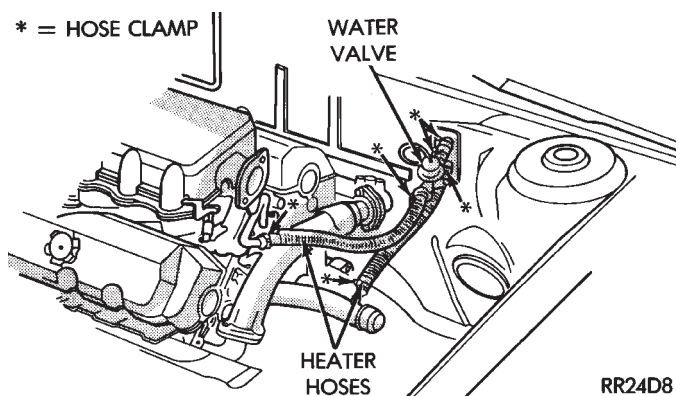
Heater Hose Routing—2.2 L, 2.5 L Engines—Typical
